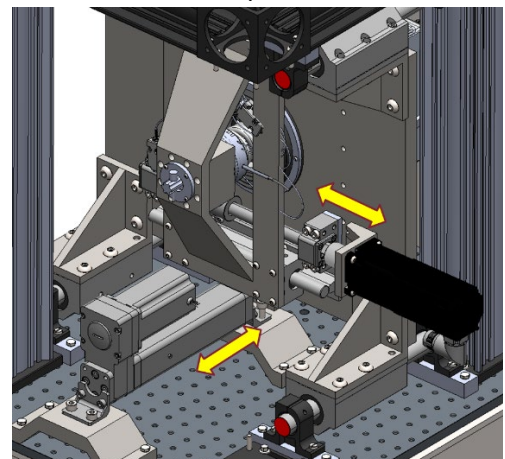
The central actuator moves the vertical rectangular plate, compressing and depressing the springs and the side mounted motor is used for the radial motion for example during the Ball on Flat test
